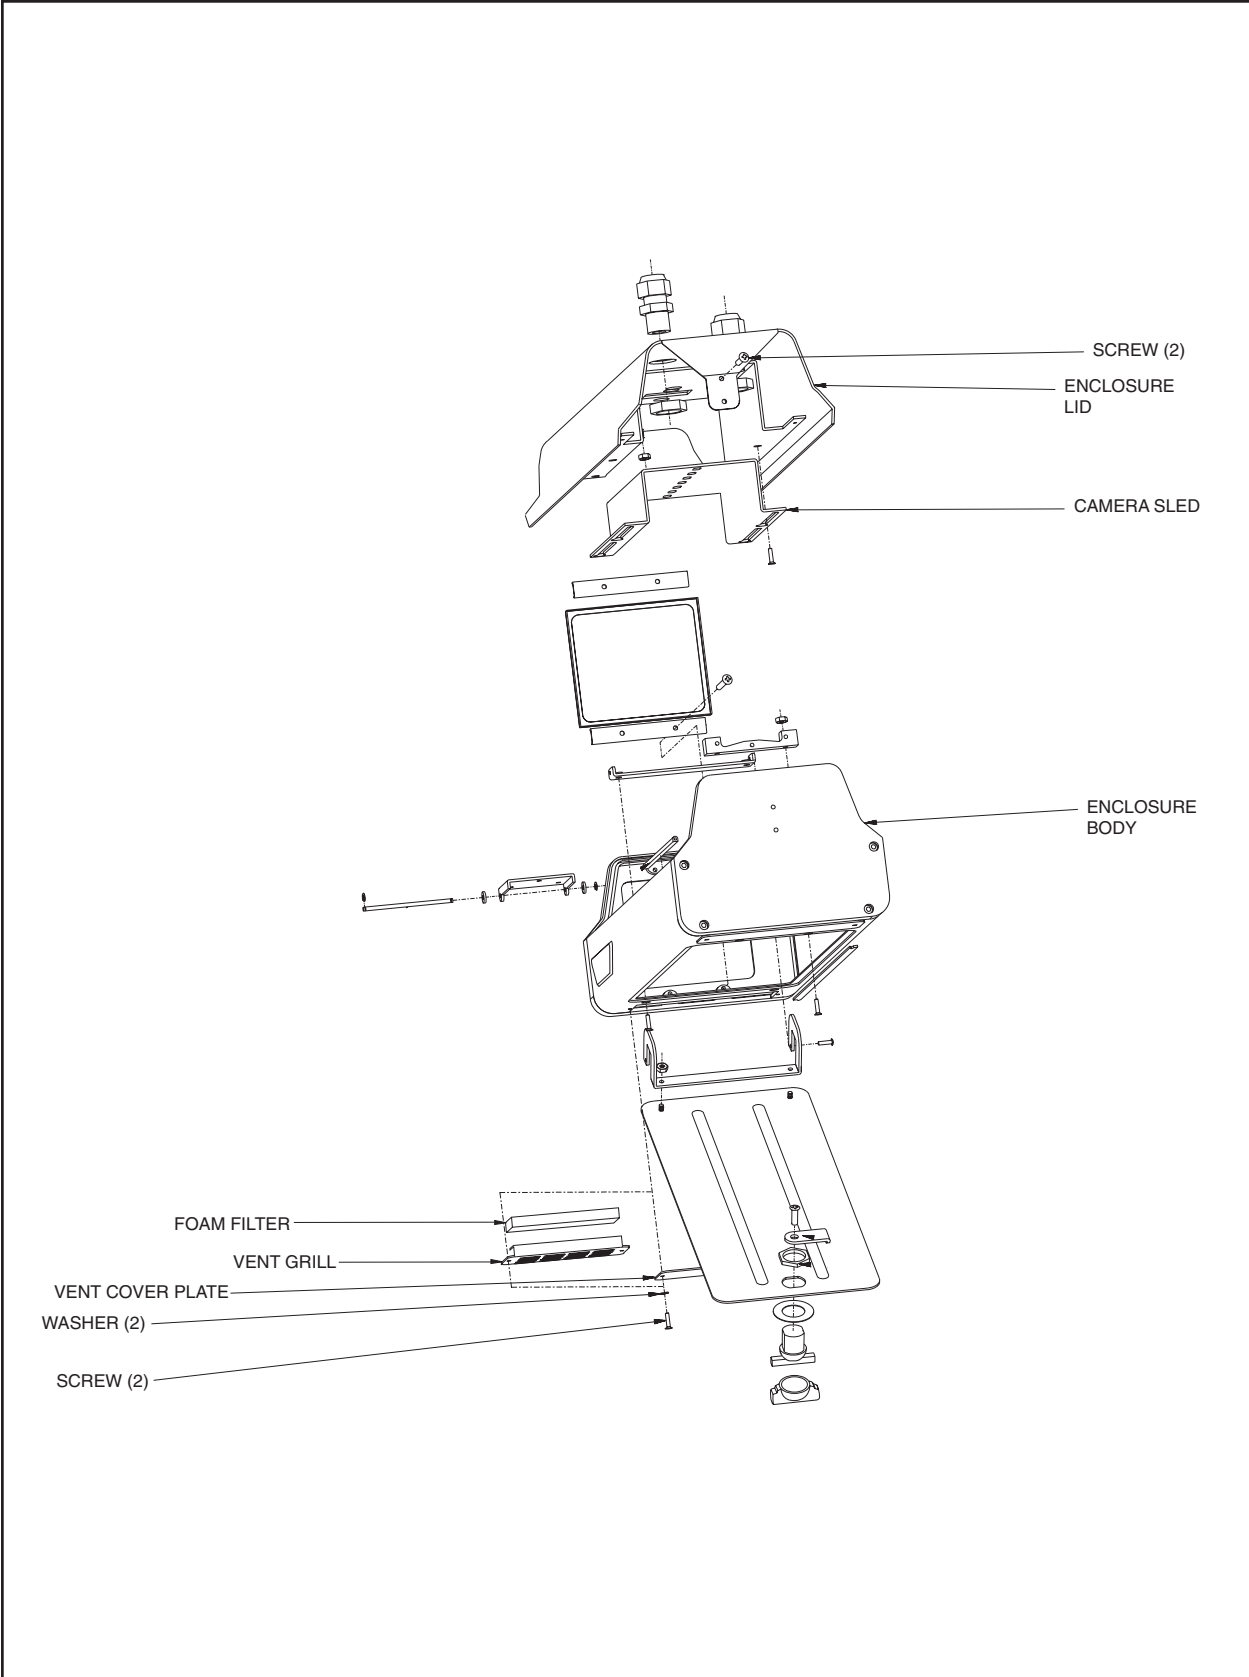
EH4712DB/EH4718DB Exploded Assembly Diagram
